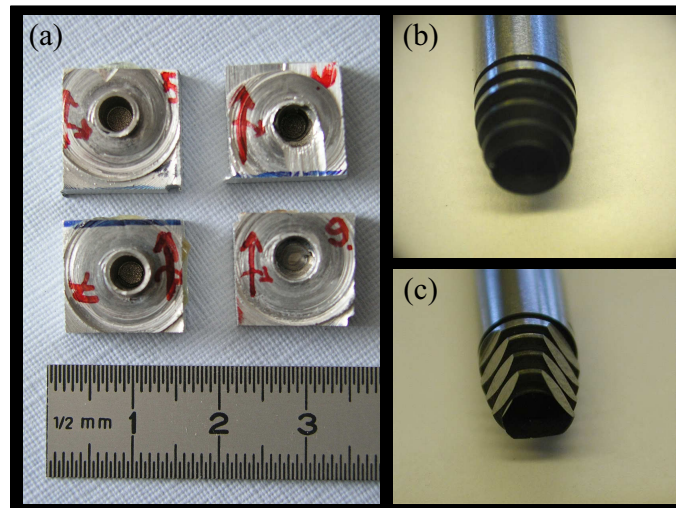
(a) Four FSW samples that were produced using the stop-action technique. The pin was partly removed by discharge machining. (b) Joining tool pin of type B (conical threaded). (c) Joining tool pin of type C (conical threaded with three flats). The pin diameter is 5 mm.
